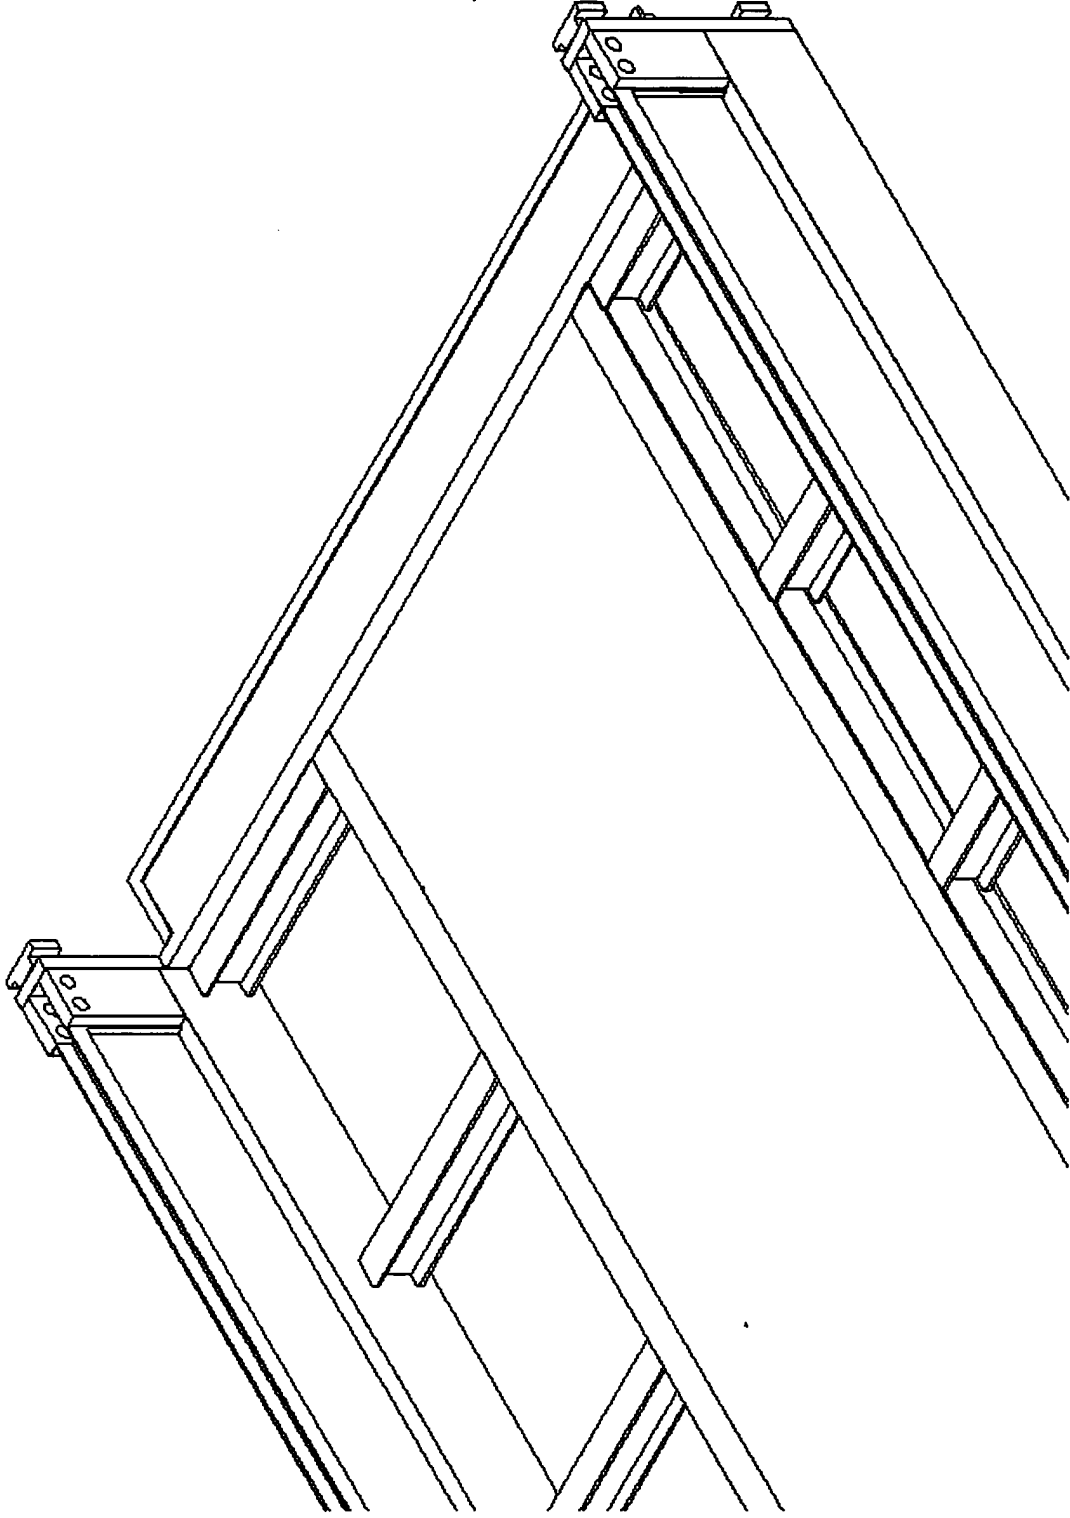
B: Isometric view of the left end of the floor frame (40 foot high cube collapsible cargo container)
